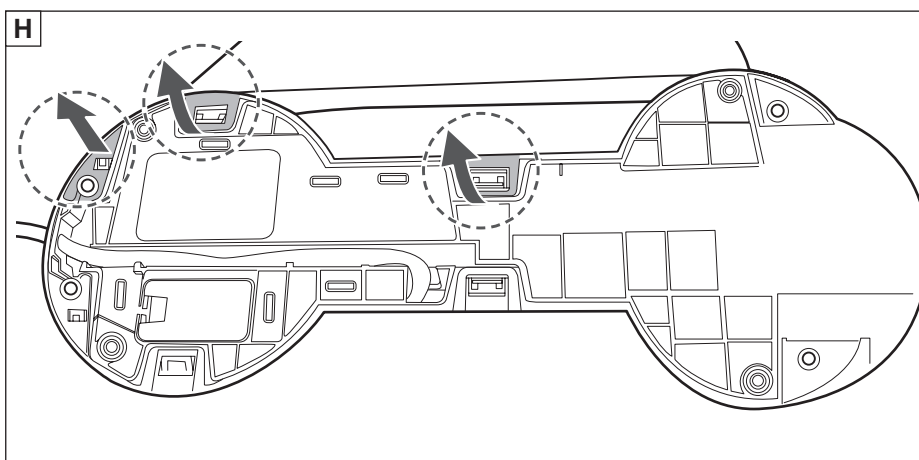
Figure H: place the machine on the right side and disengage the three mounting slots on the base.
